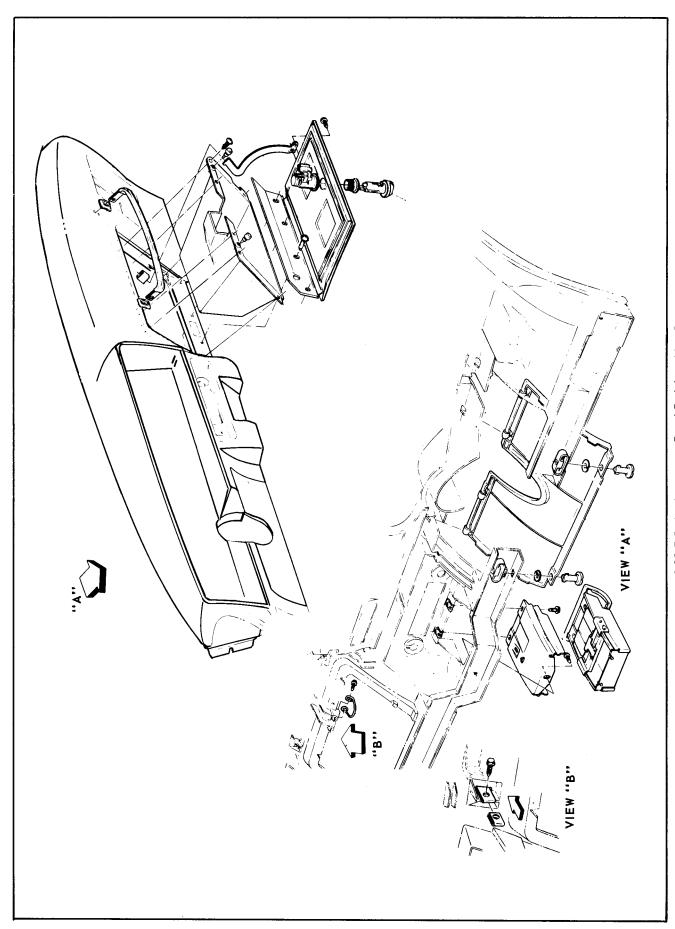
F Series Instrument Panel Pad Attaching Parts
